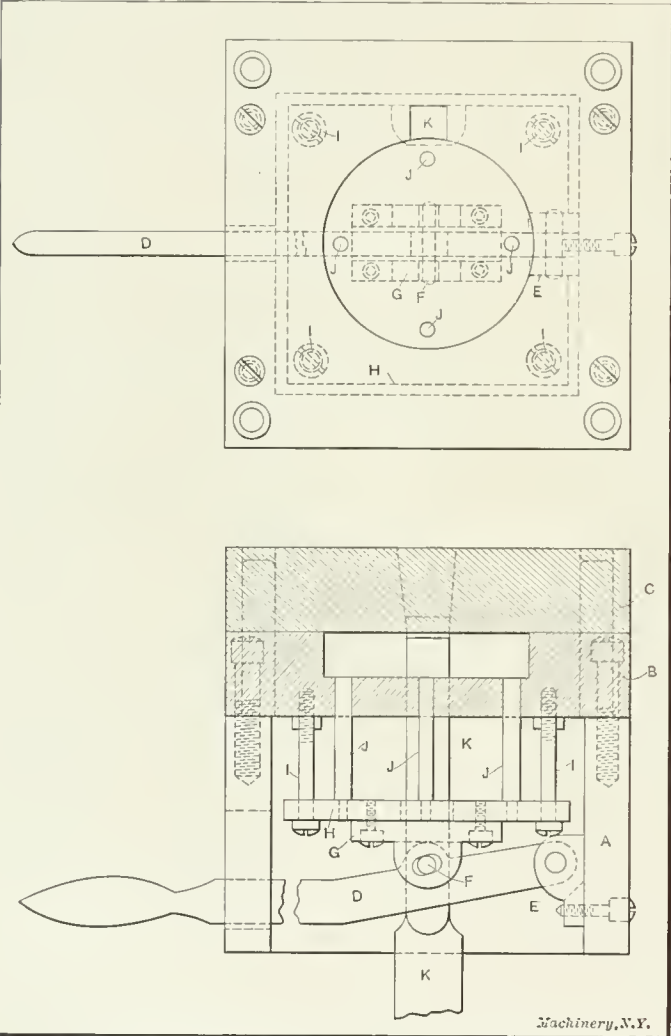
Simple Casting-die for Casting Block shown in Fig. 8
